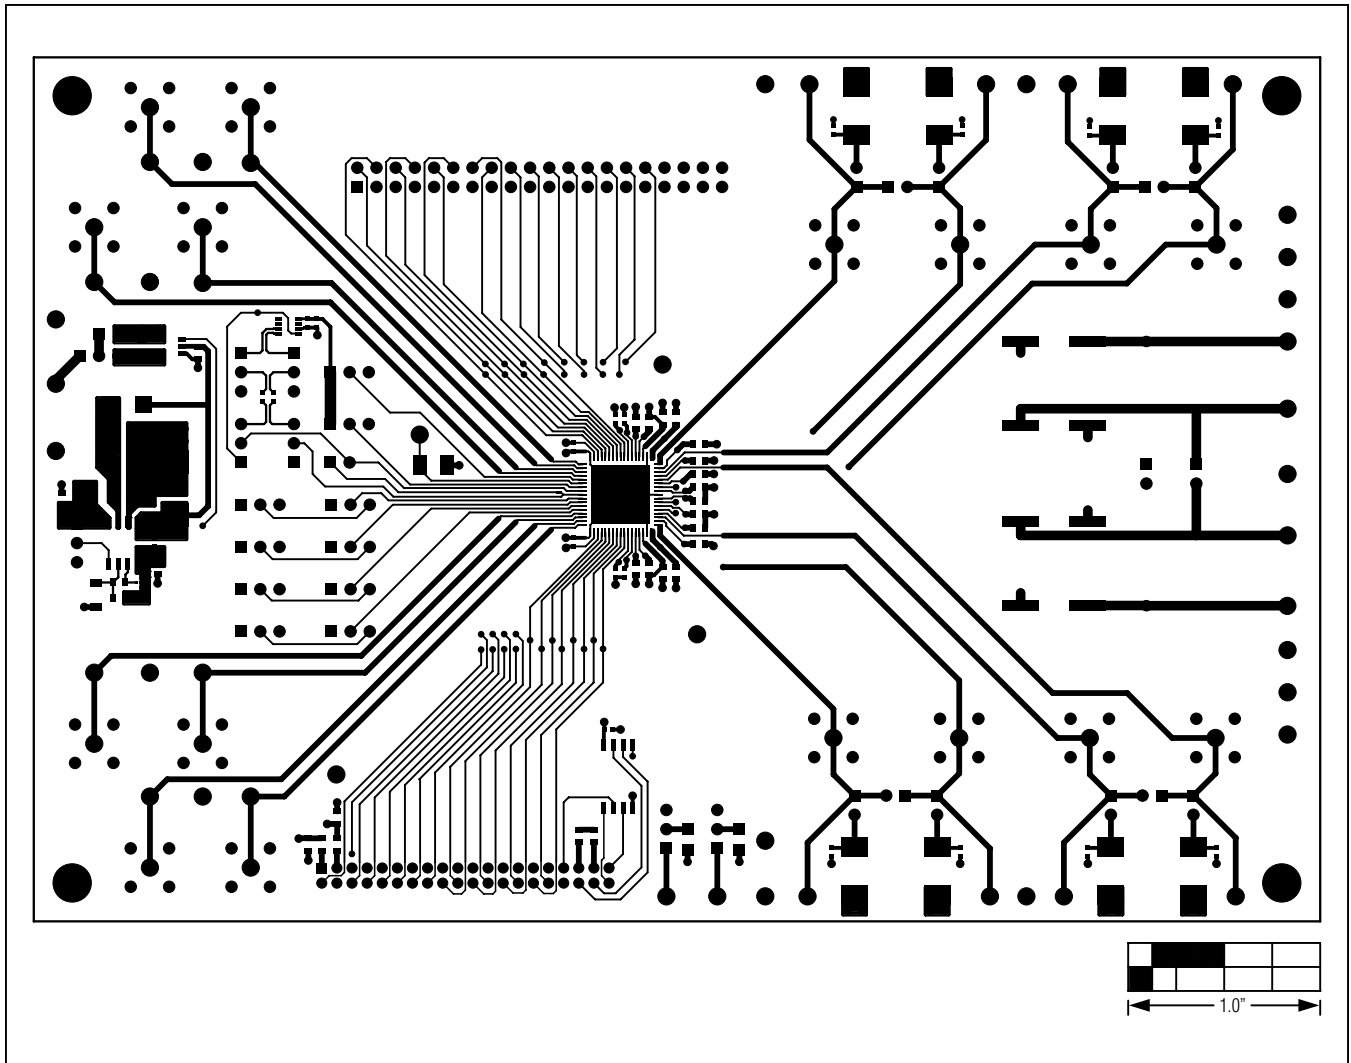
MAX14808 EV Kit PCB Layout—Component Side
